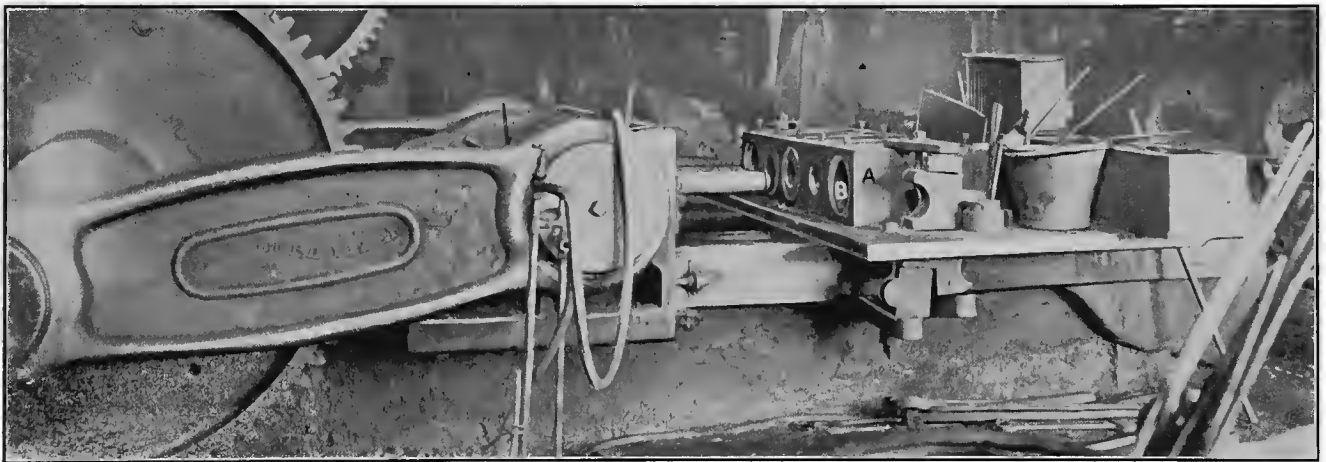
FORGING SHELL BLANKS ON A BULLDOZER
